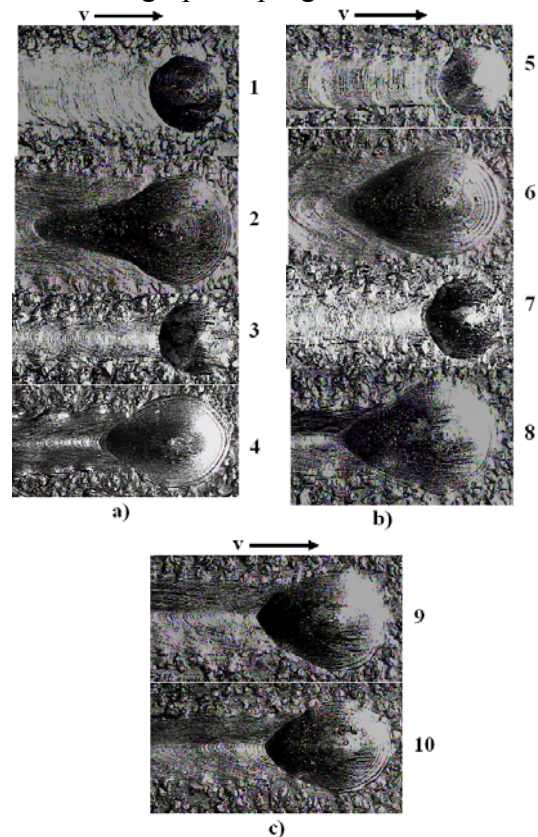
Photos of the crater produced at the end of the welding process a) focus at piece surface, b) focus within the piece c) replies
